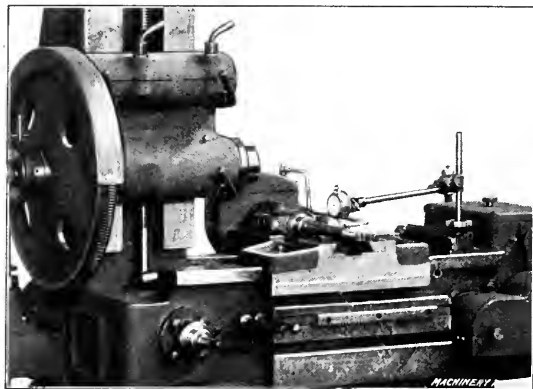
Testing Accuracy of Cutter-arbor with Spindle and Bed
